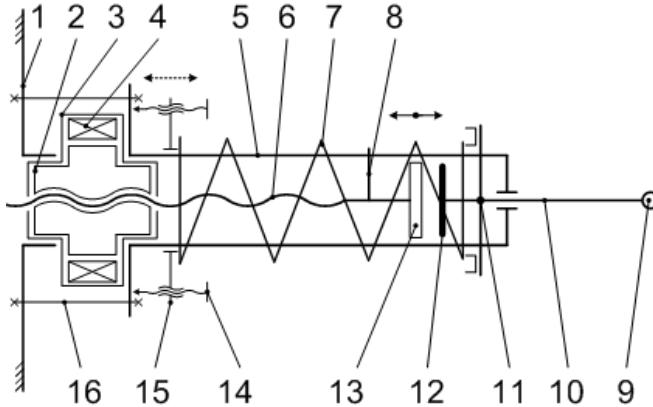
The kinematic diagram of the leg. 1 – base; 2 – threaded rotor; 3 – motor housing; 4 – motor winding; 5 – leg sleeve; 6 – threaded shaft; 7 – helical spring; 8 – anti-rotation pin; 9 – rubber sphere; 10 – firing rod; 11 – retaining disk; 12 – mild steel part; 13 – magnet; 14 – positioning screws; 15 – spacer; 16 – holding screws.
